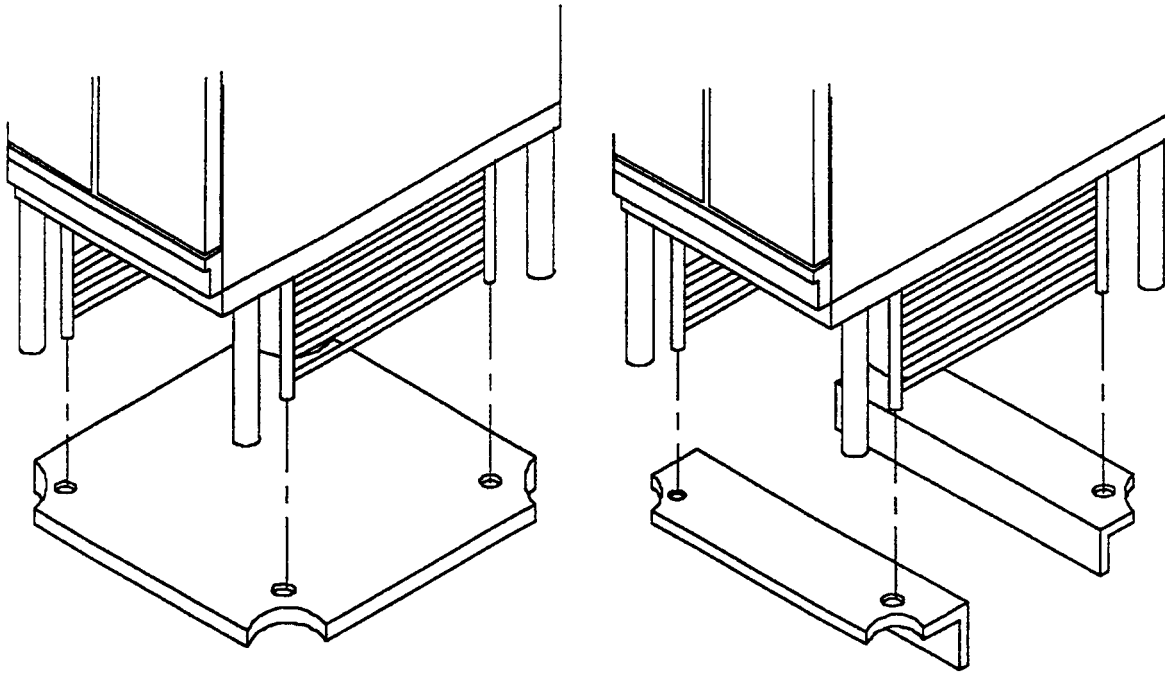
6. Secure bottom of rack guide to shelf or front and rear channel frames with side rack clips. Refer to figure 16.
